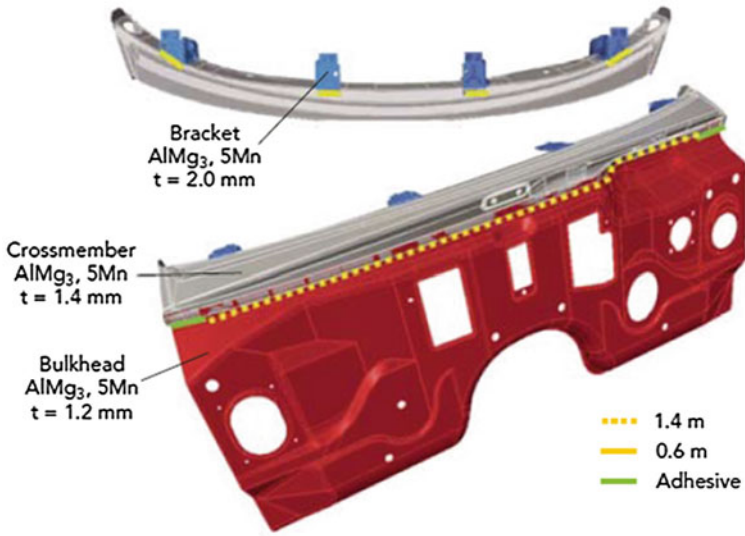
Sheet metal bulk head joined to hydroformed cross member which has several brackets laser welded on to it [65]
